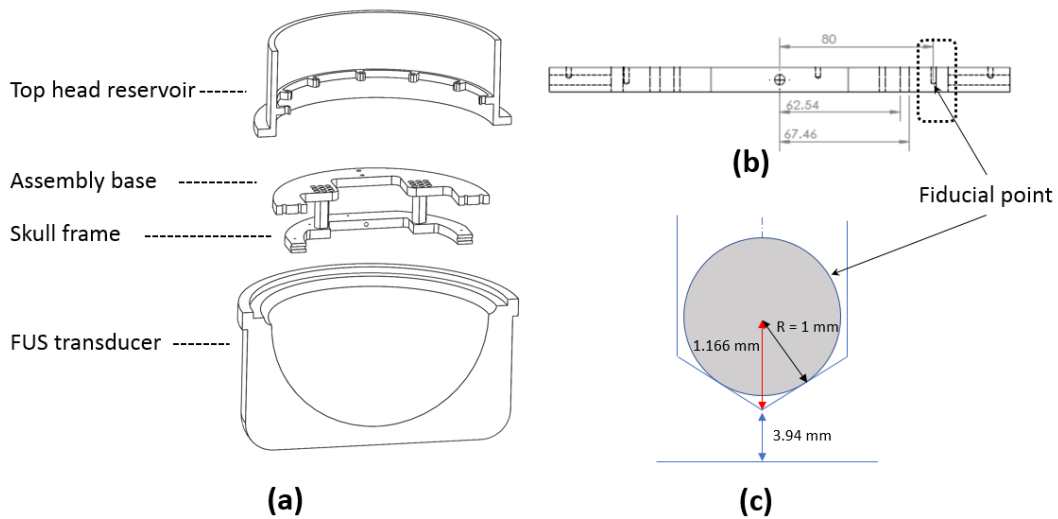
(a) A CAD sketch of transducer, skull assembly, skull frame and top-head reservoir (b) The sectional view of the skull frame which imbedded 8 fiducial point. (c) The sketch illustrates the relative heights between the geometrical center of fiducial point and the lower face of the skull frame
